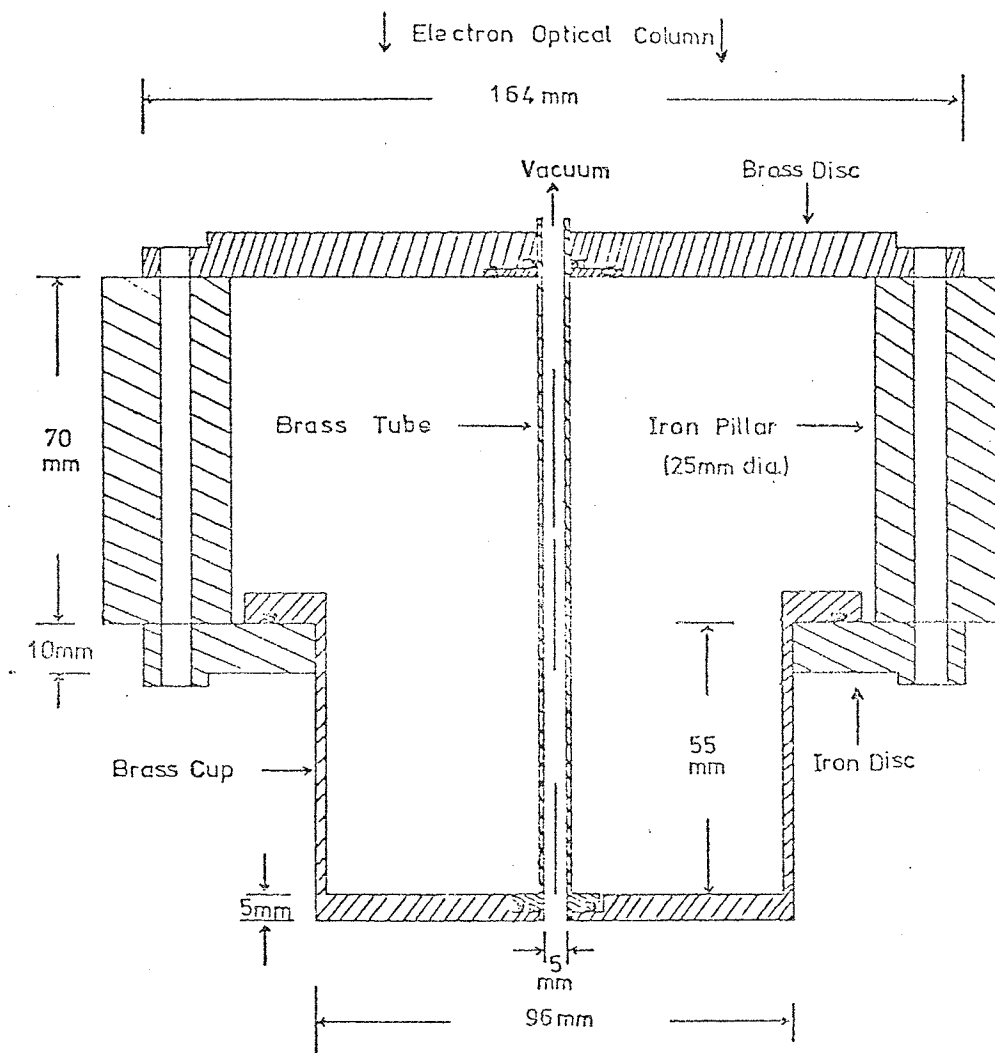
Cross-section of the miniature projection stage which fits onto the flange of the EM6 viewing chamber.
